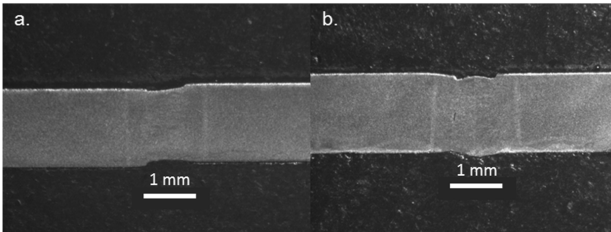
Butt joint, 300 s: (a) shot blasted, (b) without shot blasting.
